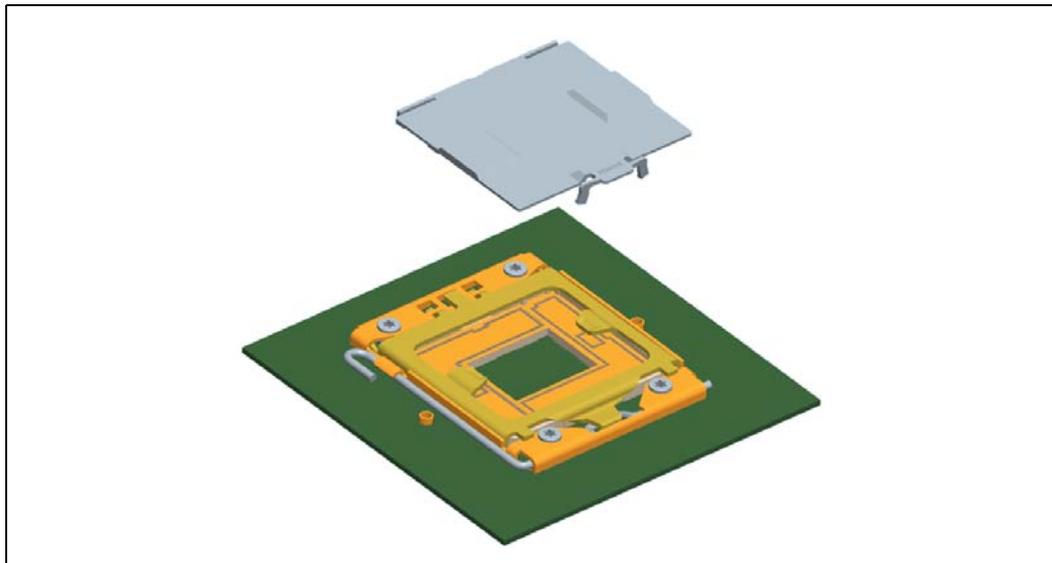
HL-ILM Cover assembly onto HL-ILM
